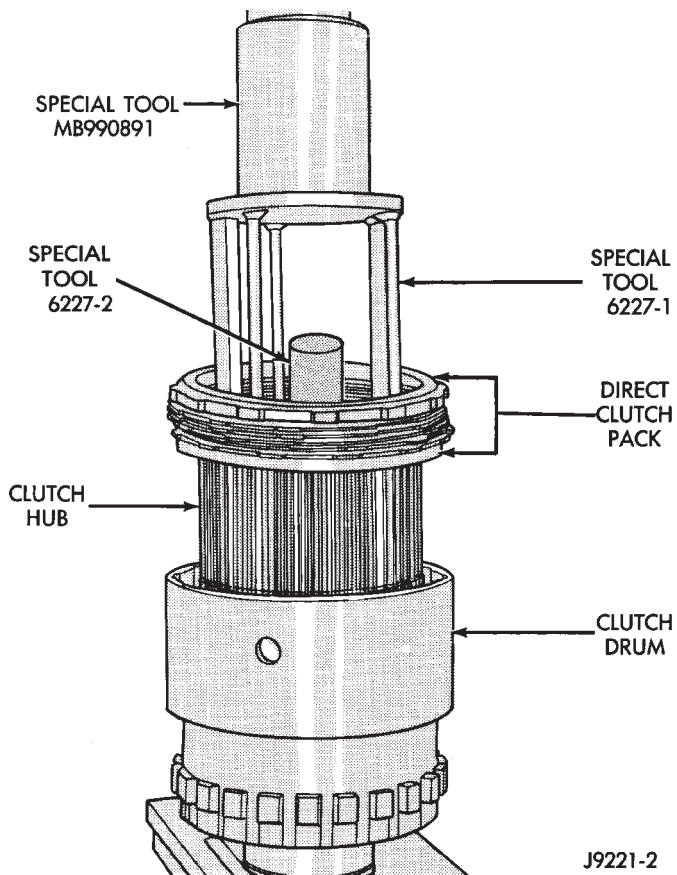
Installing Assembled Direct Clutch Pack And Hub
